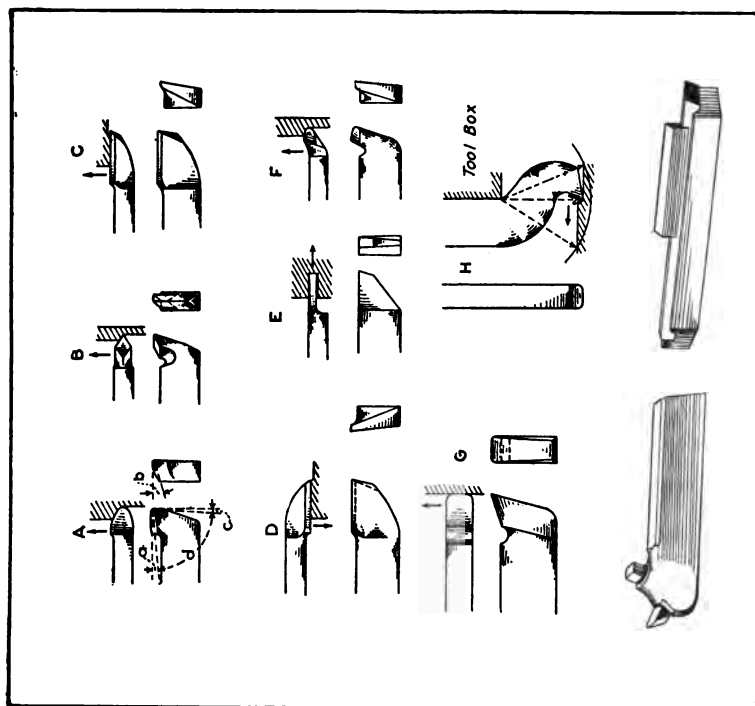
TYPES OF LATHE AND PLANER TOOLS
